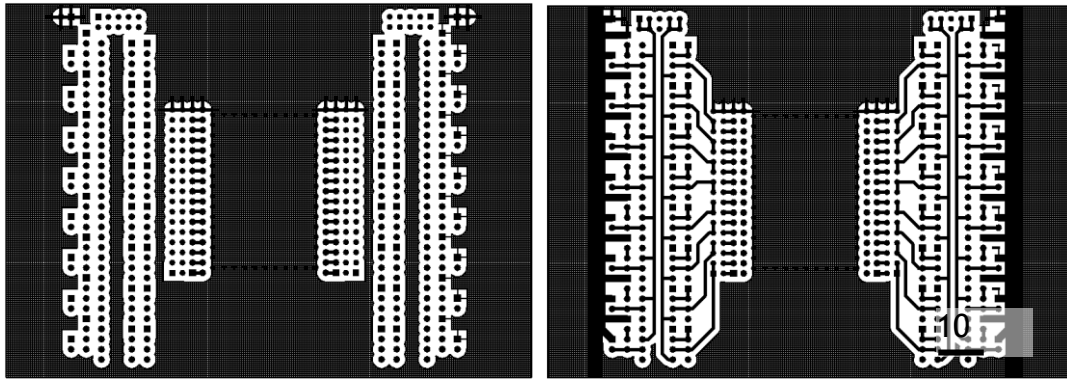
The mask of the PCB layout. Left: top side of PCB; Right: bottom side.
